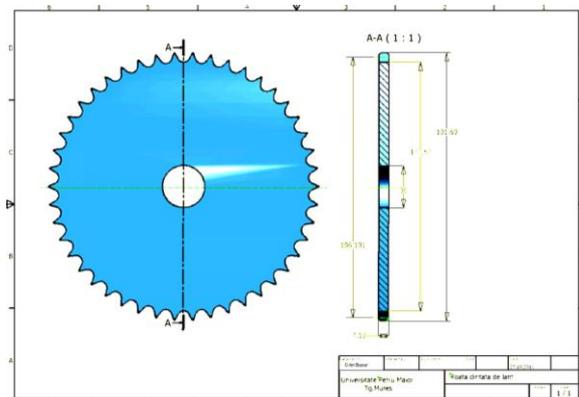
Drawing of execution the chain wheel [1],[3],[8],[9]
